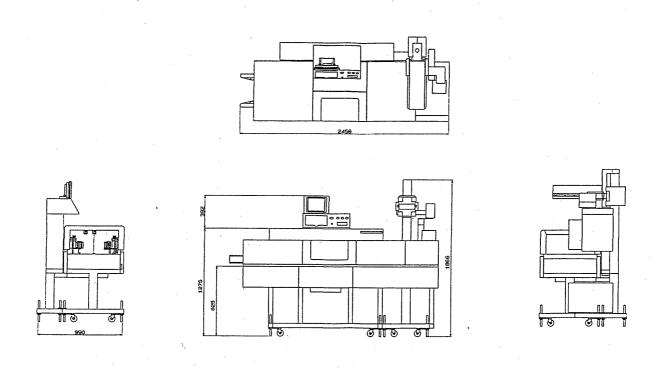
External Dimensions (Drawing 65-1525-03)
